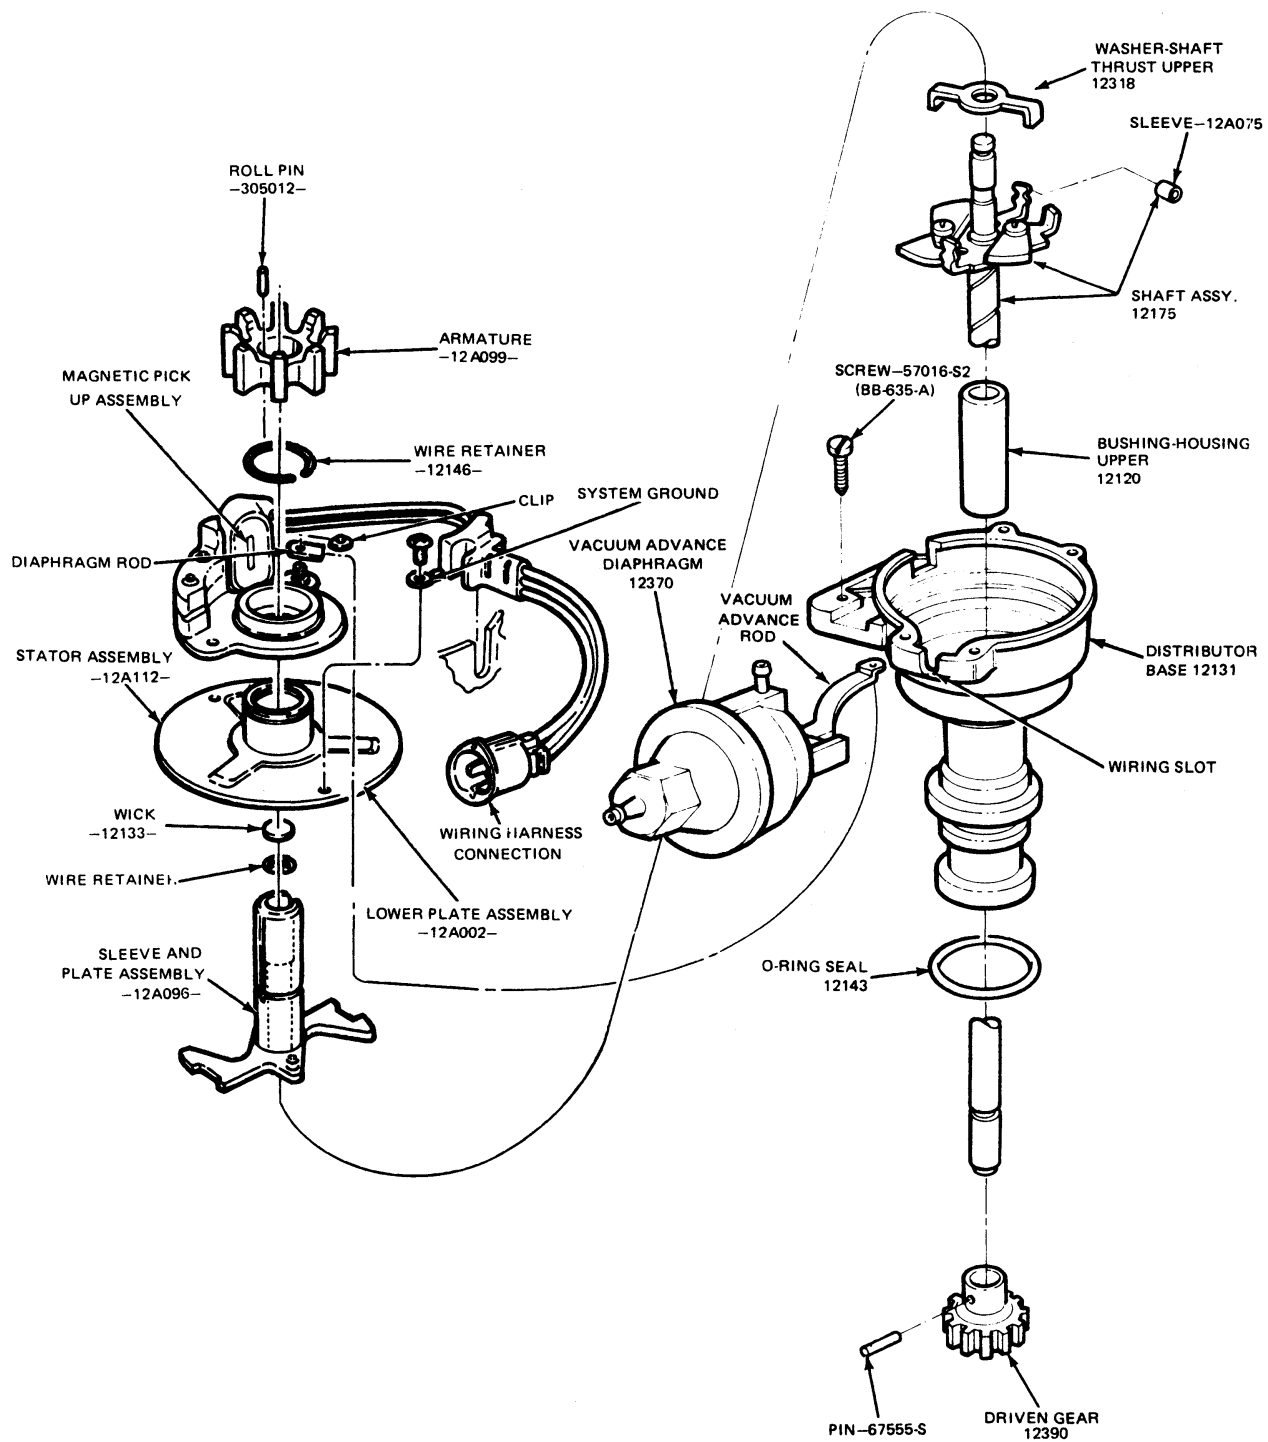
Typical Breakerless Distributor—6-Cylinder—Disassembled
